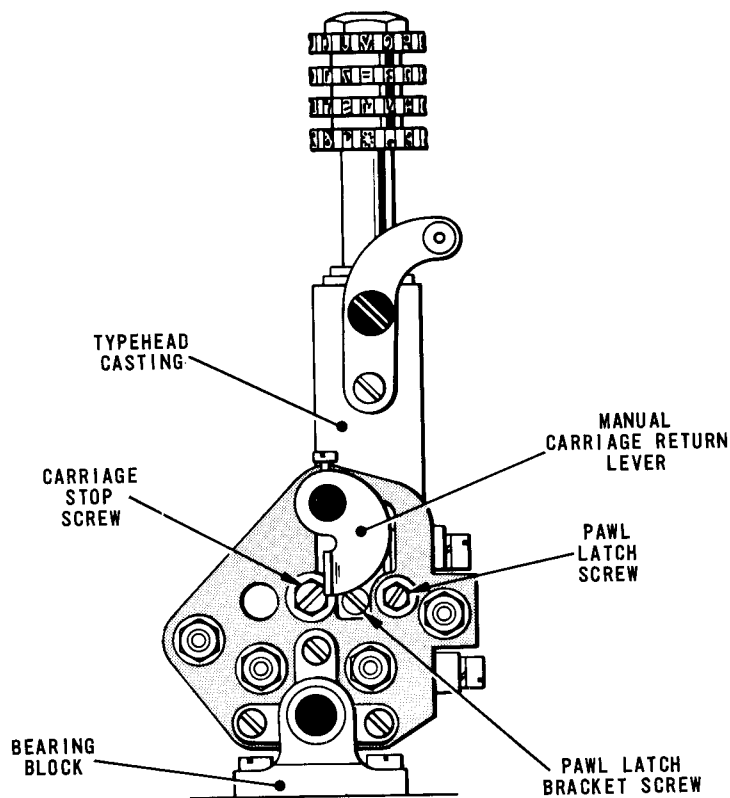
TYPEHEAD CARRIAGE—LEFT-HAND END
